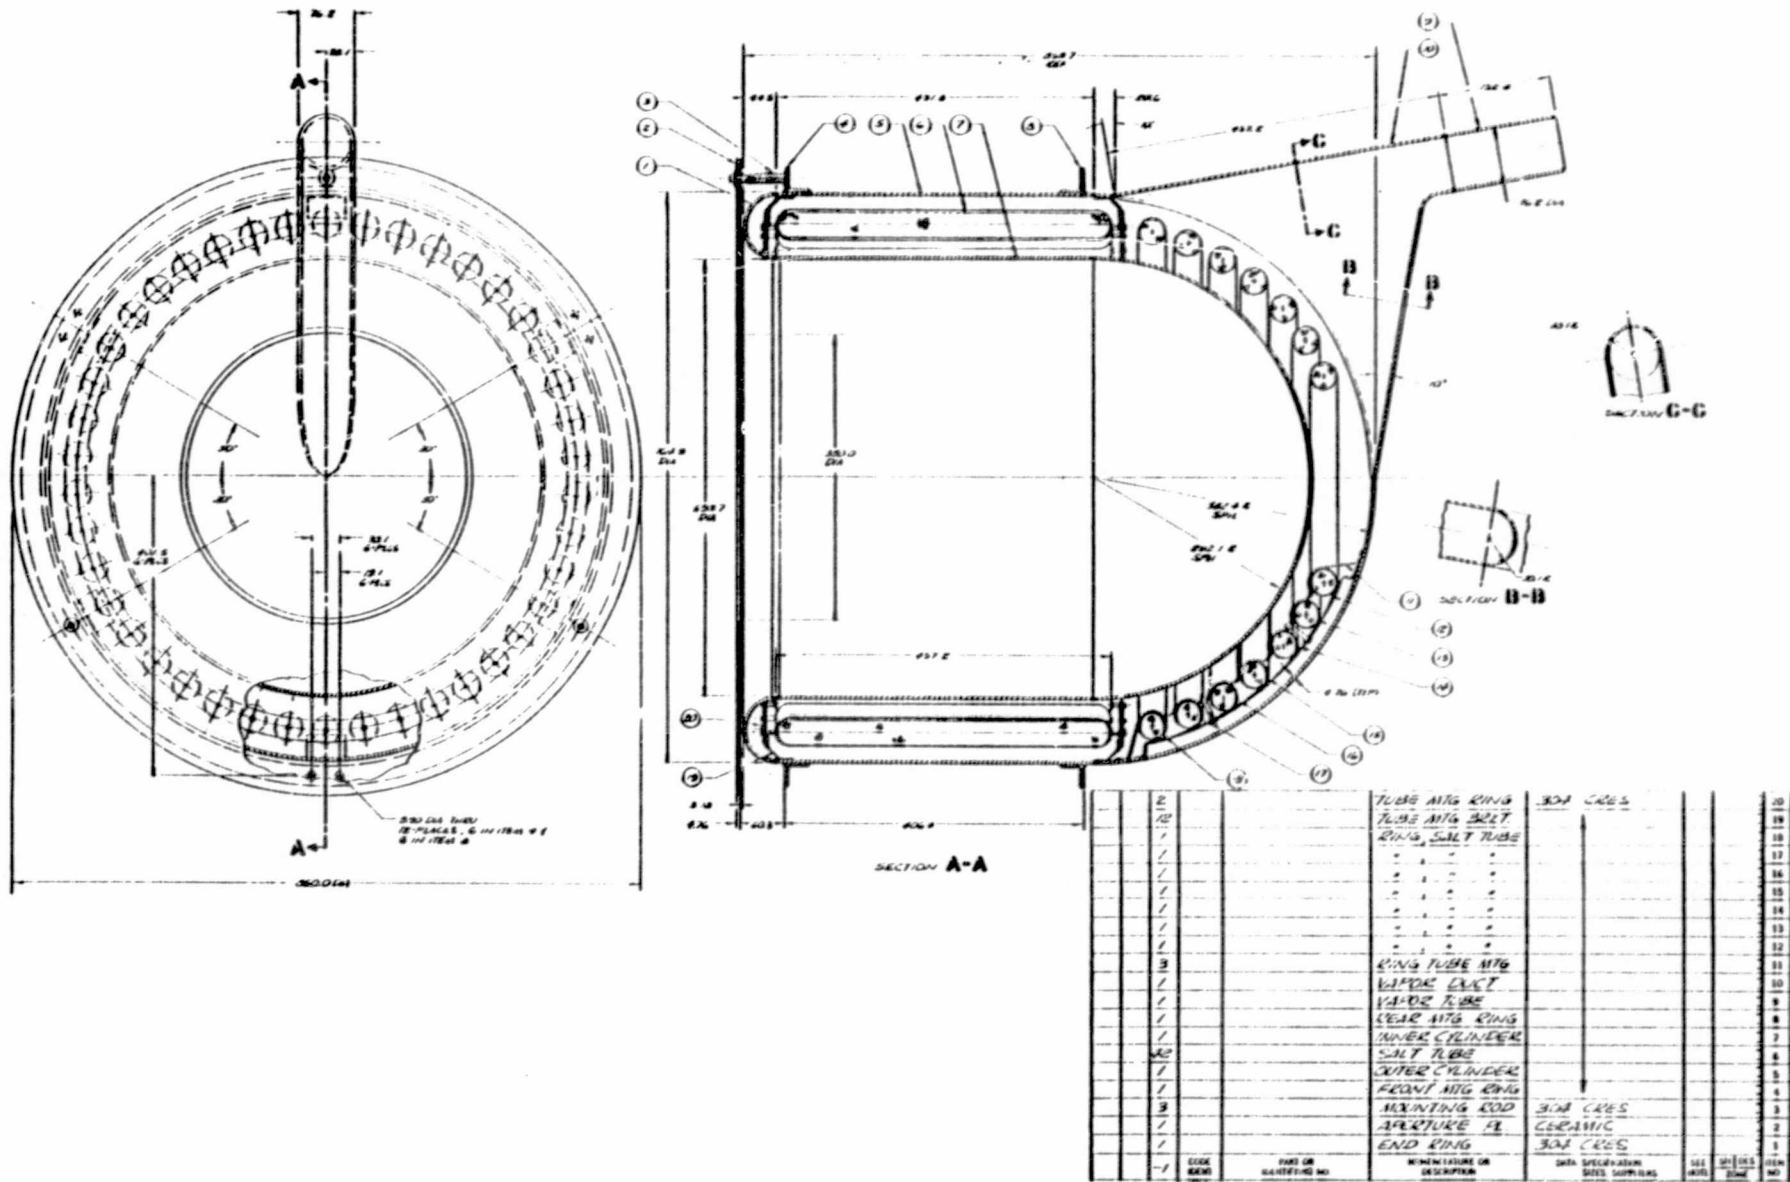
SODIUM RECEIVER WITH EUTECTIC SALT BUFFER STORAGE
